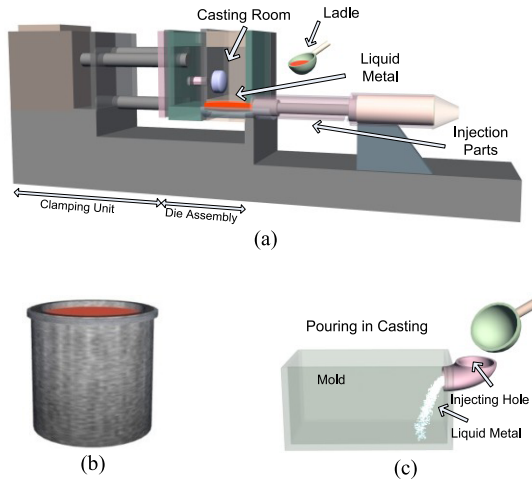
Metal-mold die-casting system. (a) Metal-mold die-casting machine (from <http://www.custompartnet.com/>). (b) Boiler (loading area). (c) Injection Position.
